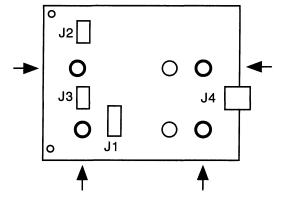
MR-76 Wheels/Pressure Board Standoff Locations
